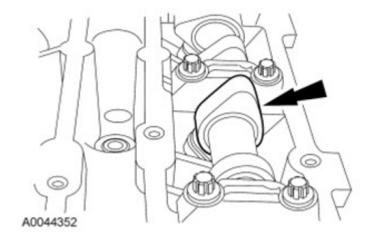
Locating Camshaft Lobes Courtesy of FORD MOTOR CO.
